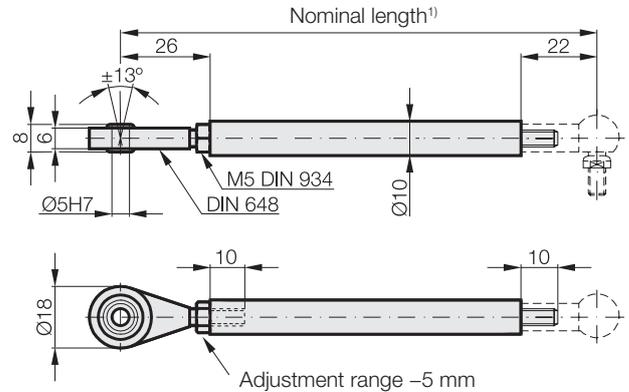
BTL2-GS10- _____ -A joint rod
